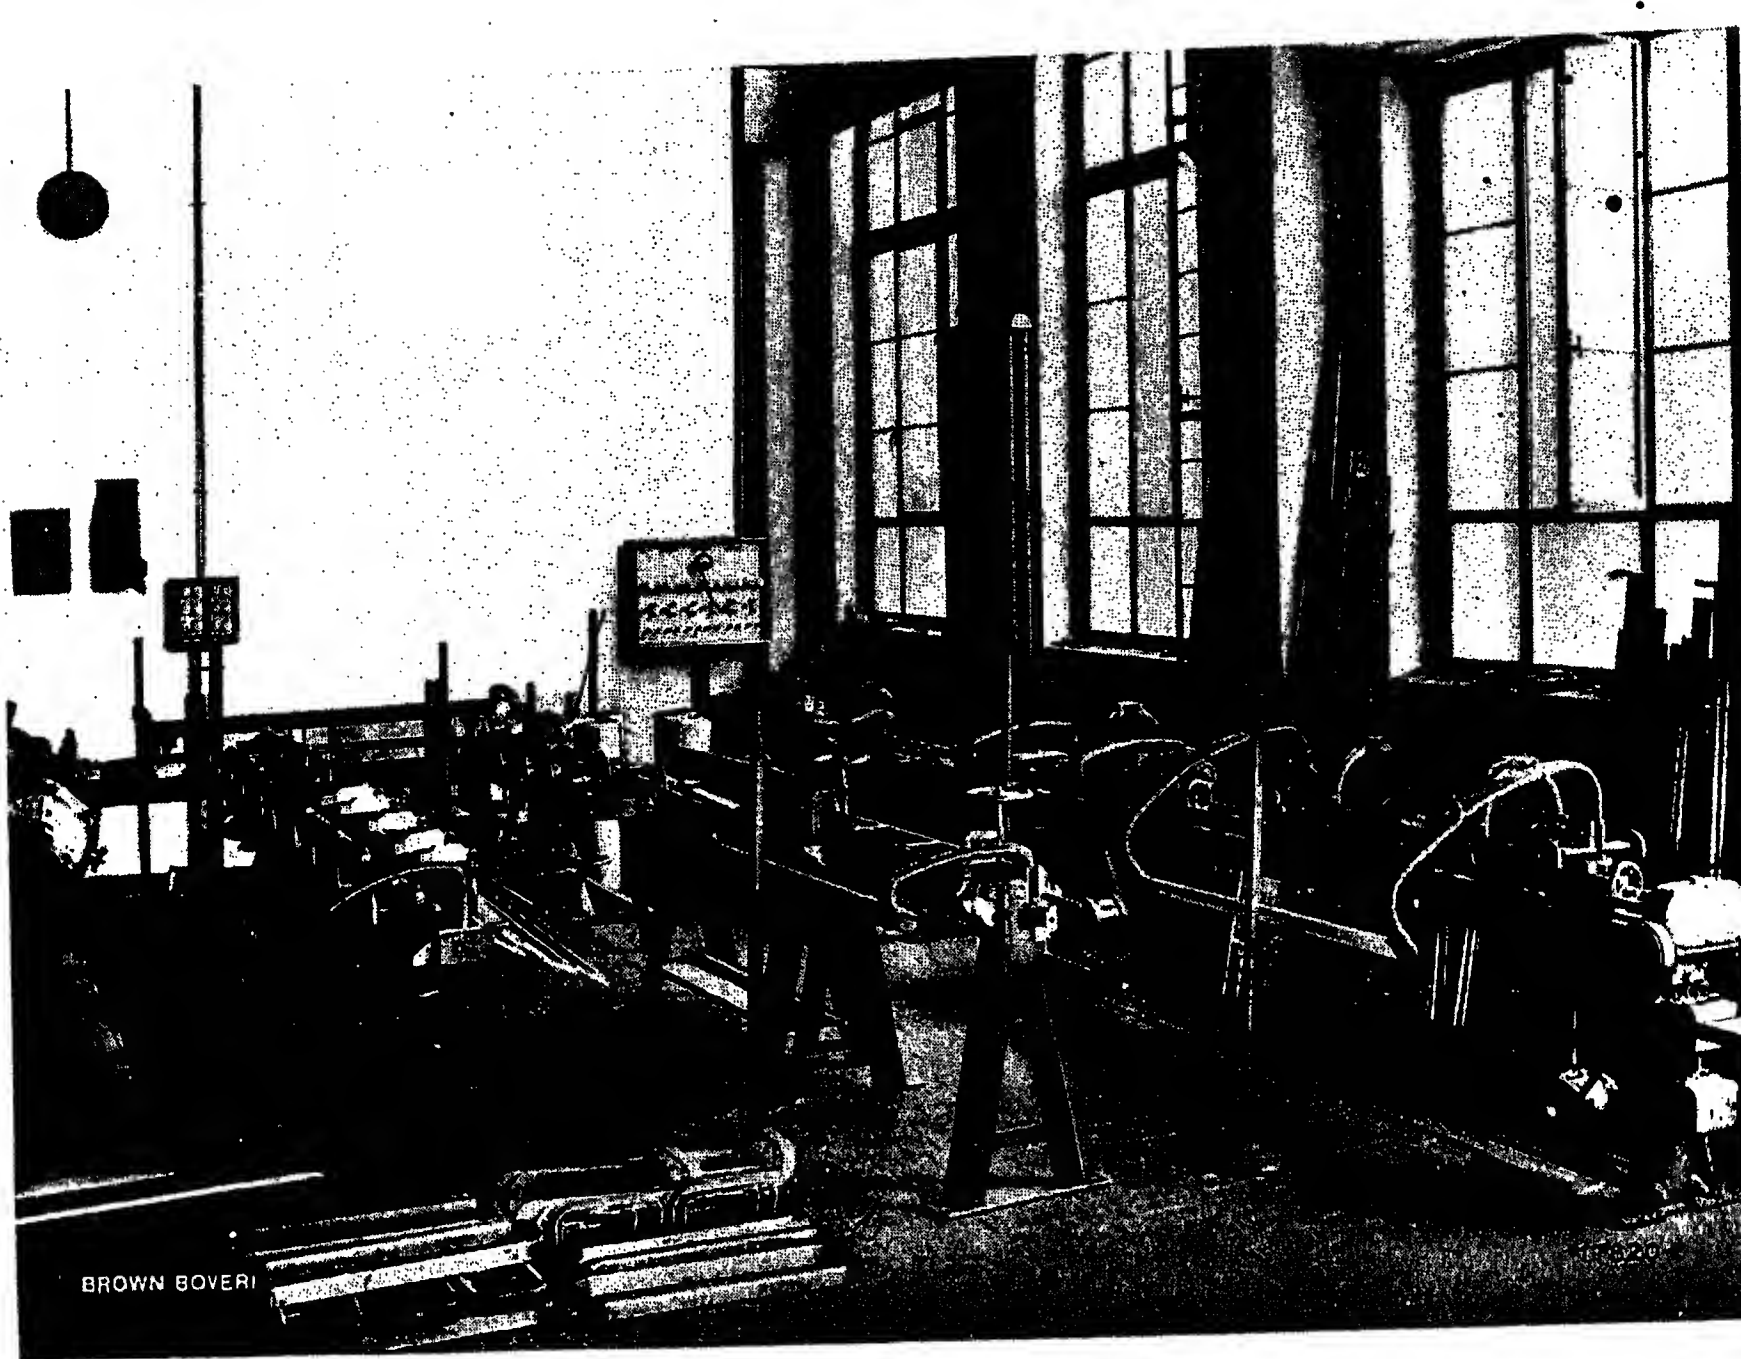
Machines for sheathing the high-tension windings with micanite.
